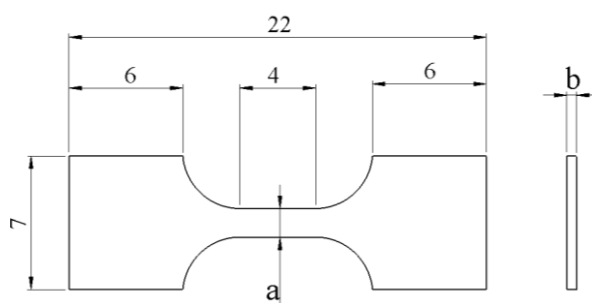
Technical drawing of small tensile specimens (mm) [52]
